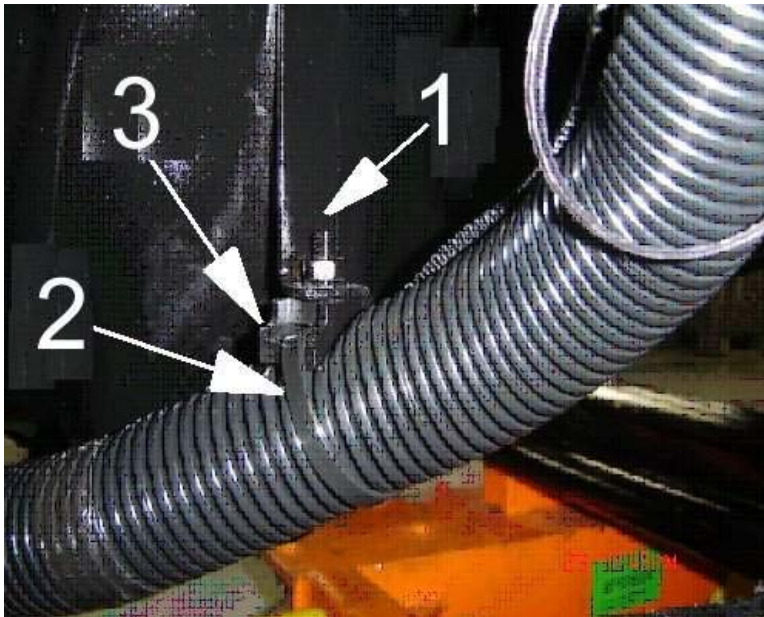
Install Saddle and Cable Strap Lock to Retain Harness on Passenger Side of Engine Crossmember
